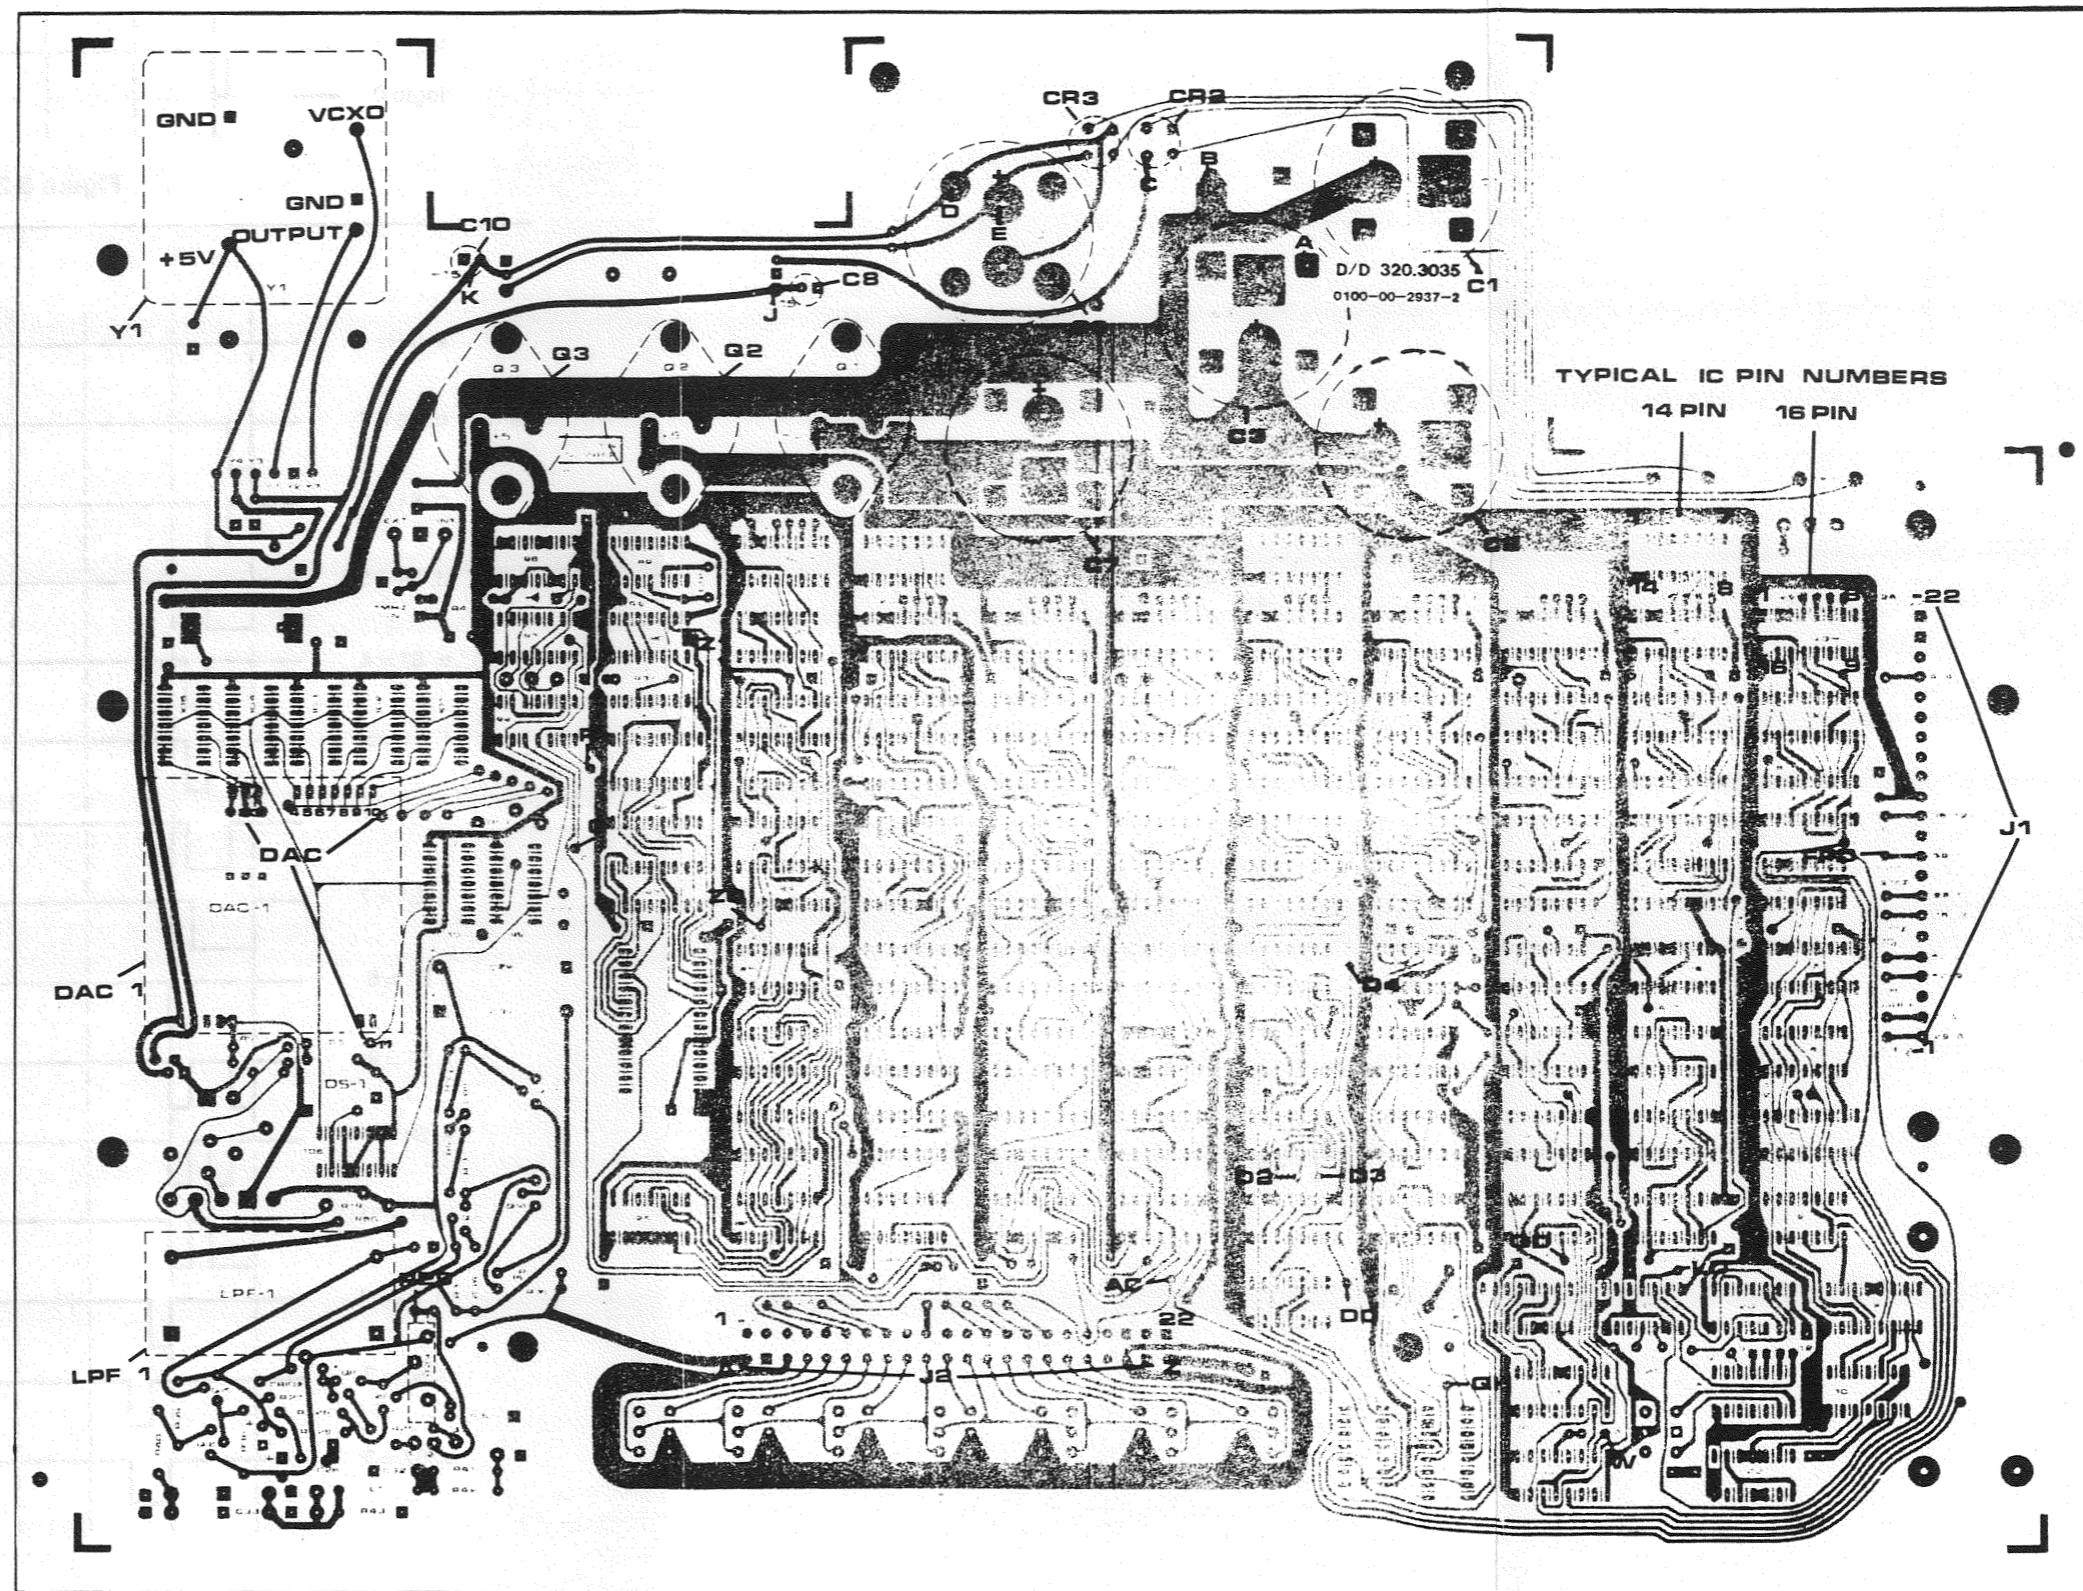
Motherboard Assembly A1 — Bottom Side
